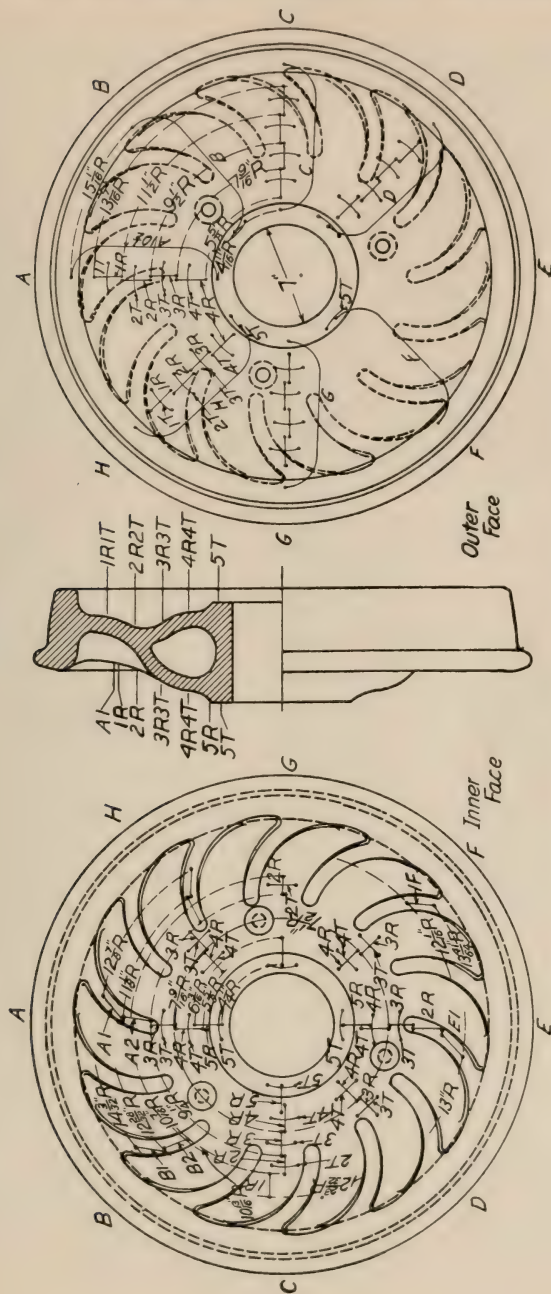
LOCATION OF GAGE-LINES ON 33-IN. 725-LB. M. C. B. WHEEL No. 671 449
